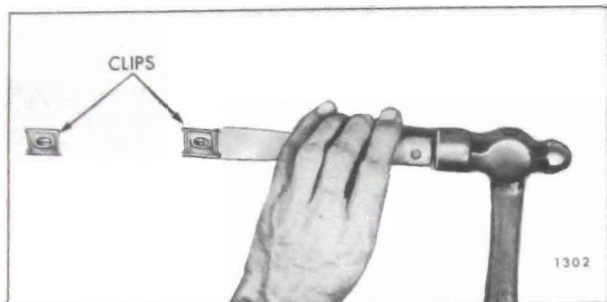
Removal of Bath-Tub Type Molding Clip
